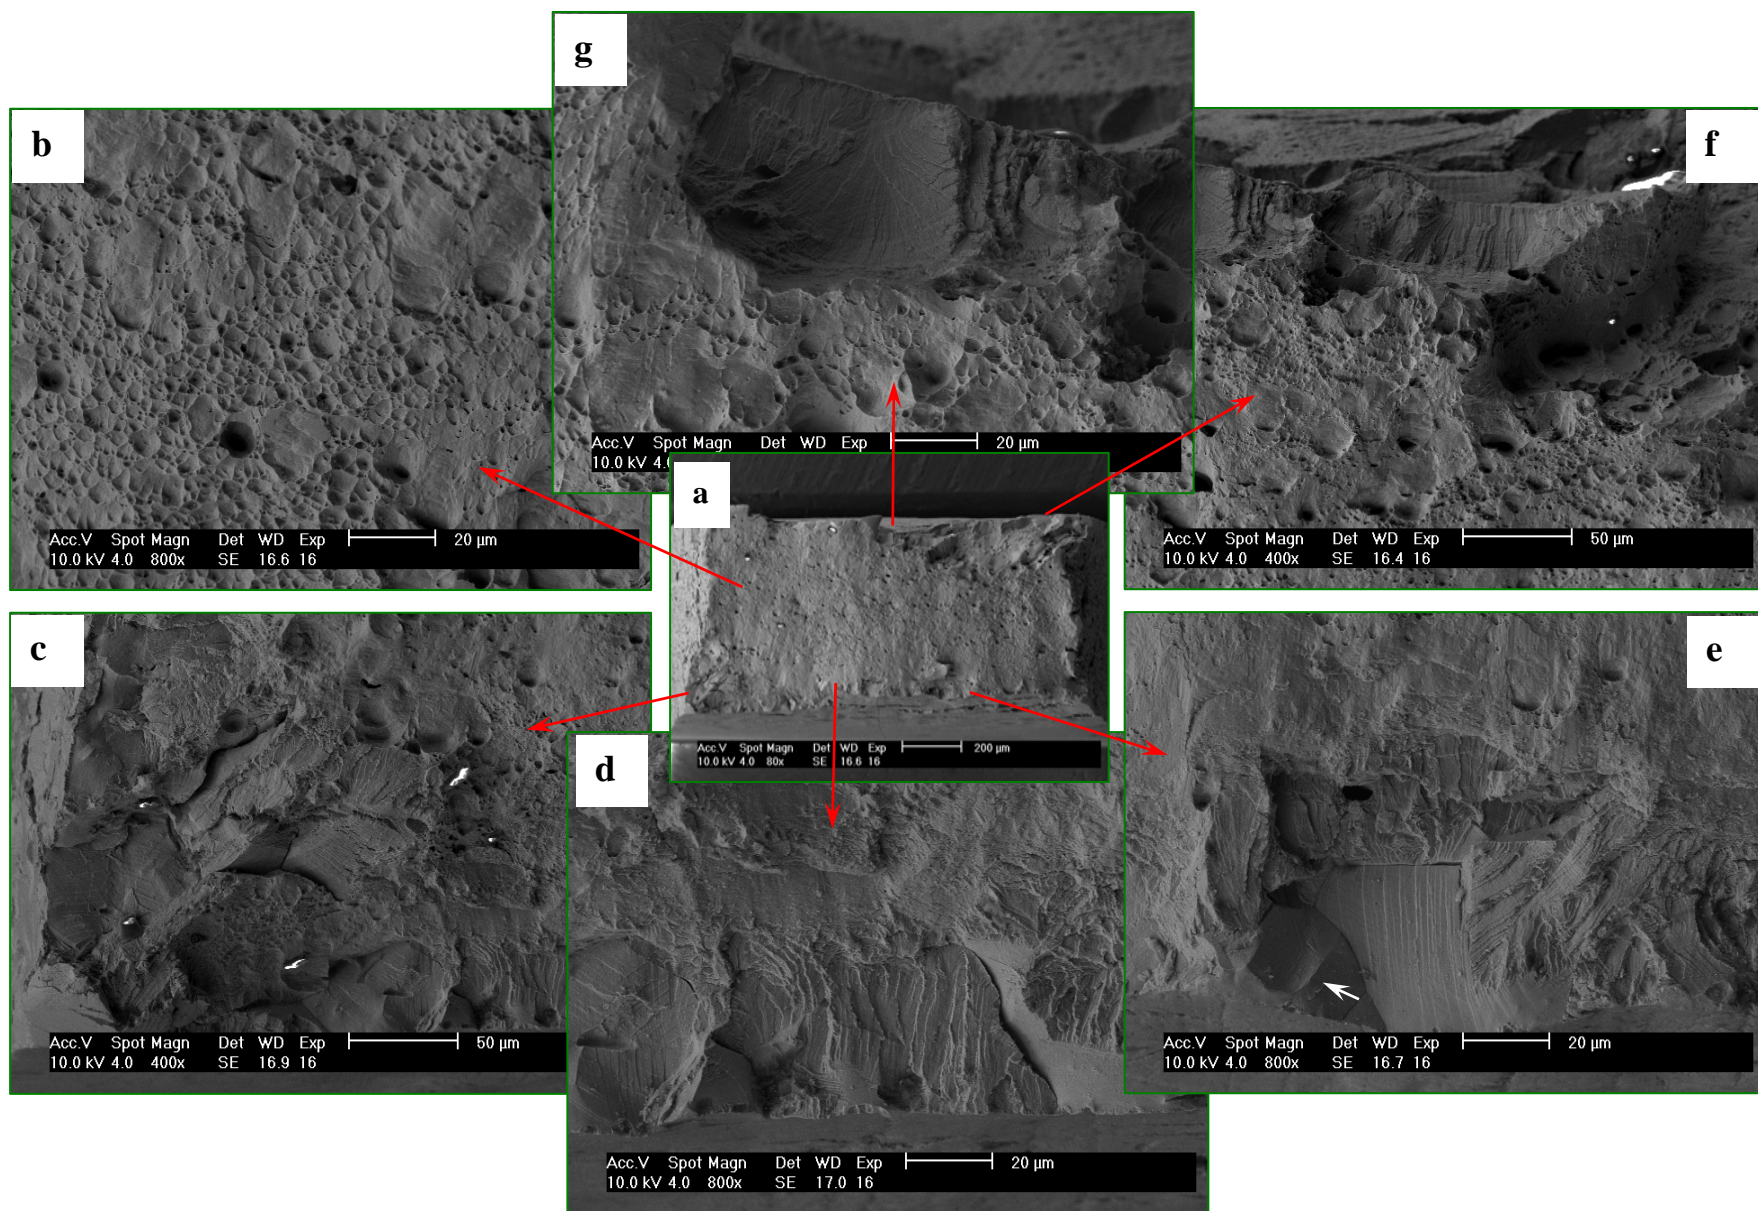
Fracture surface of SA Type 316 SS irradiated to 47.2 dpa and tested in PWR water (specimen B5-5).
